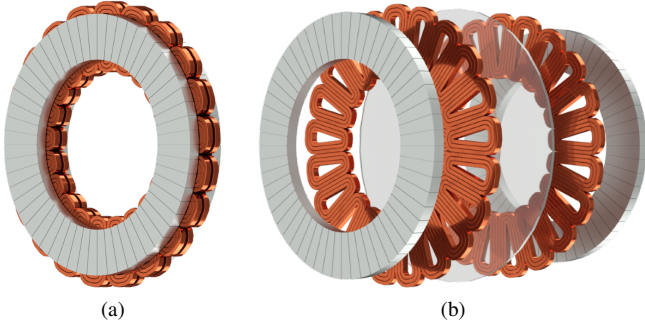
Single-disk coreless AFPM motor with Halbach rotors showing (a) compact and (b) exploded views
